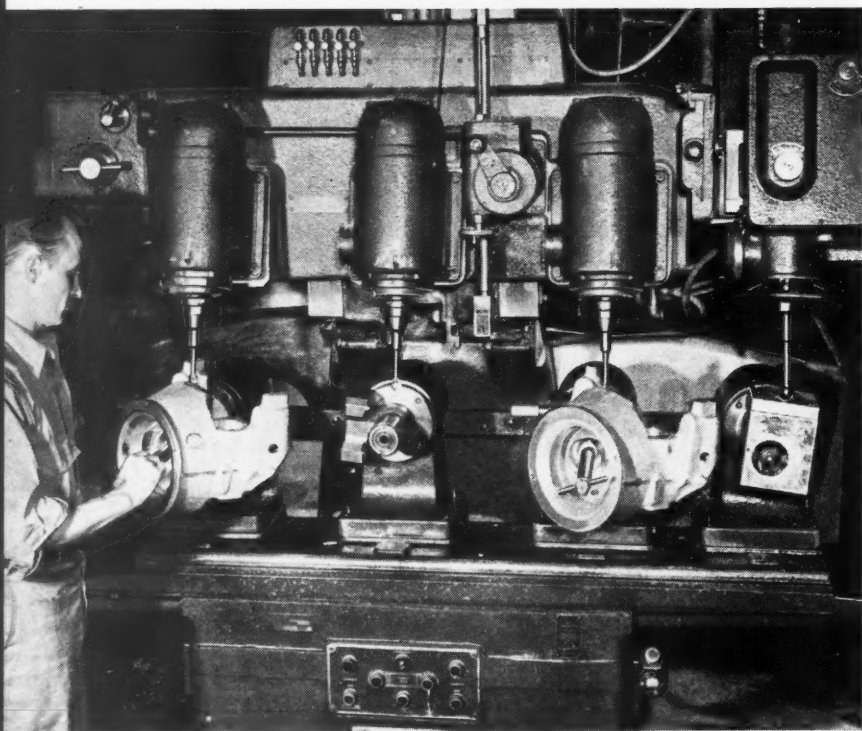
Three-spindle Hydro-Tel machine used for machining the internal contours of intake and exhaust ports in the cylinder heads
